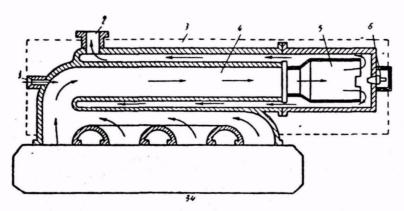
Diagram of flame neutralizer of carburetor engine exhausts, built into the exhaust manifold:
